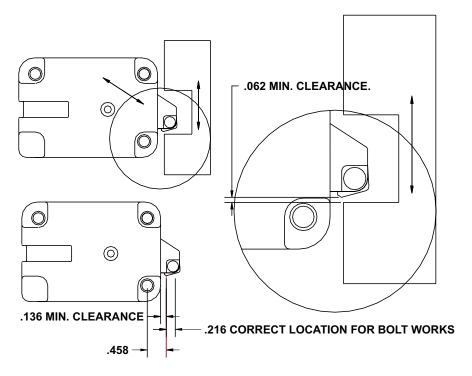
Square Nose Slide Bolt Clearances and Positioning
